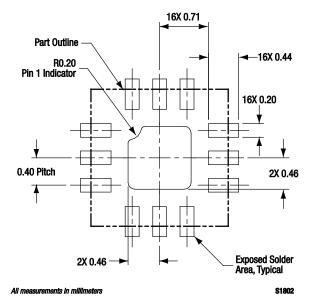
SKY13445-368LF PCB Layout Footprint (Top View)
